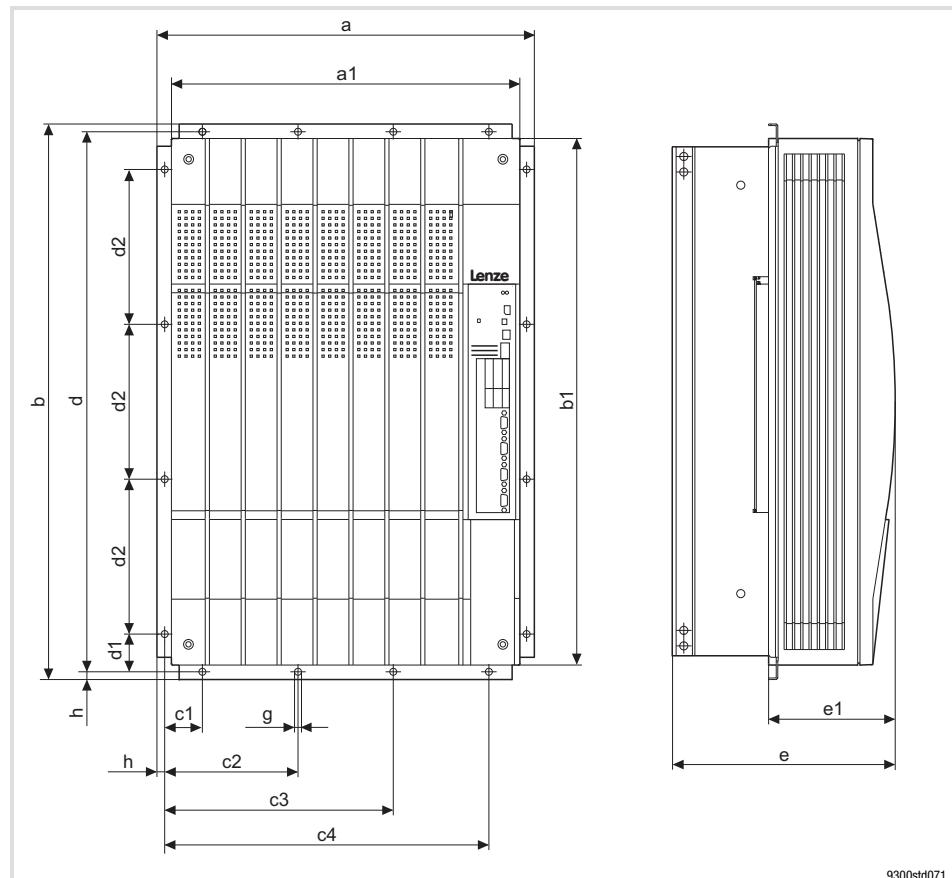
Dimensions for thermally separated mounting 55 ... 75 kW
